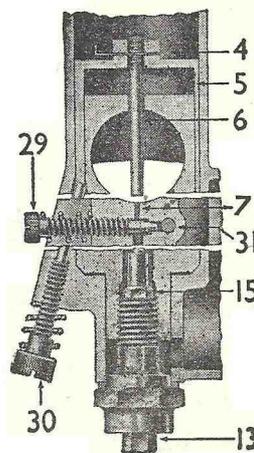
Section through Mixing Chamber, showing Air Valve and Throttle closed.
